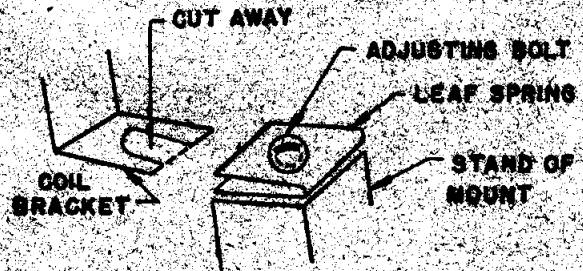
Revised method of mounting the variable inductances of the model TED equipment.
